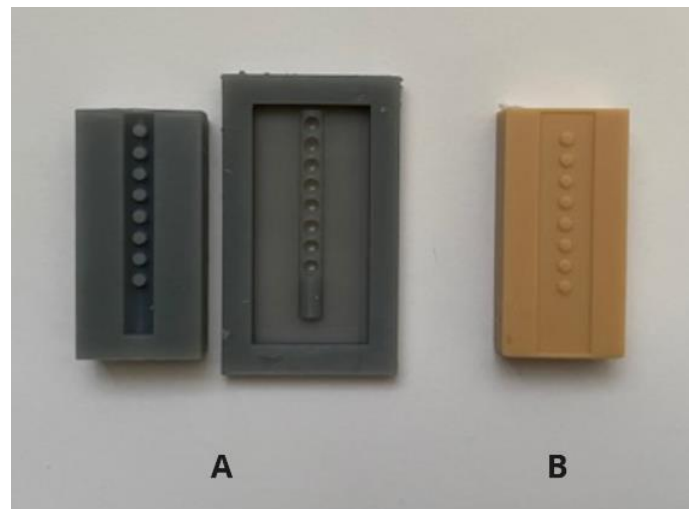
Image of the used moulds, where mould A is used for casting of the top and self-regulating valves and mould B for the footprint.
